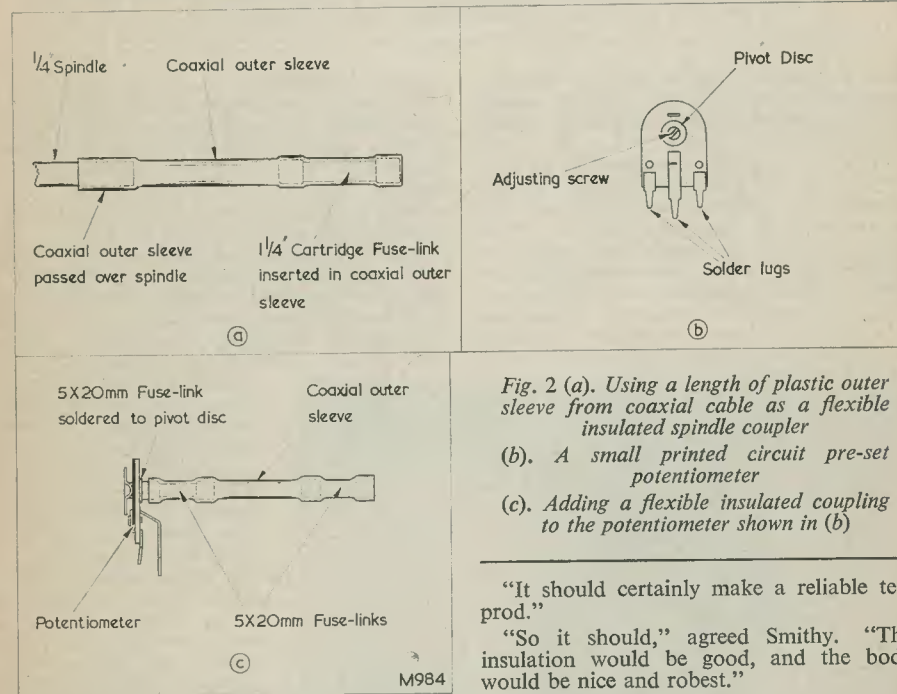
(a). Using a length of plastic outer sleeve from coaxial cable as a flexible insulated spindle coupler
